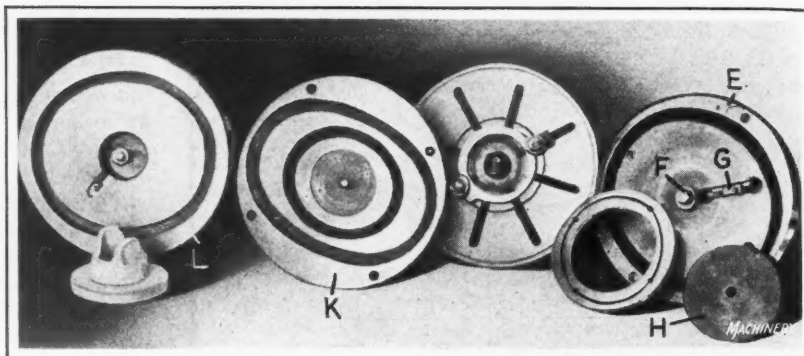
Master Plates used with the Lathe Equipment shown in Fig. 1
